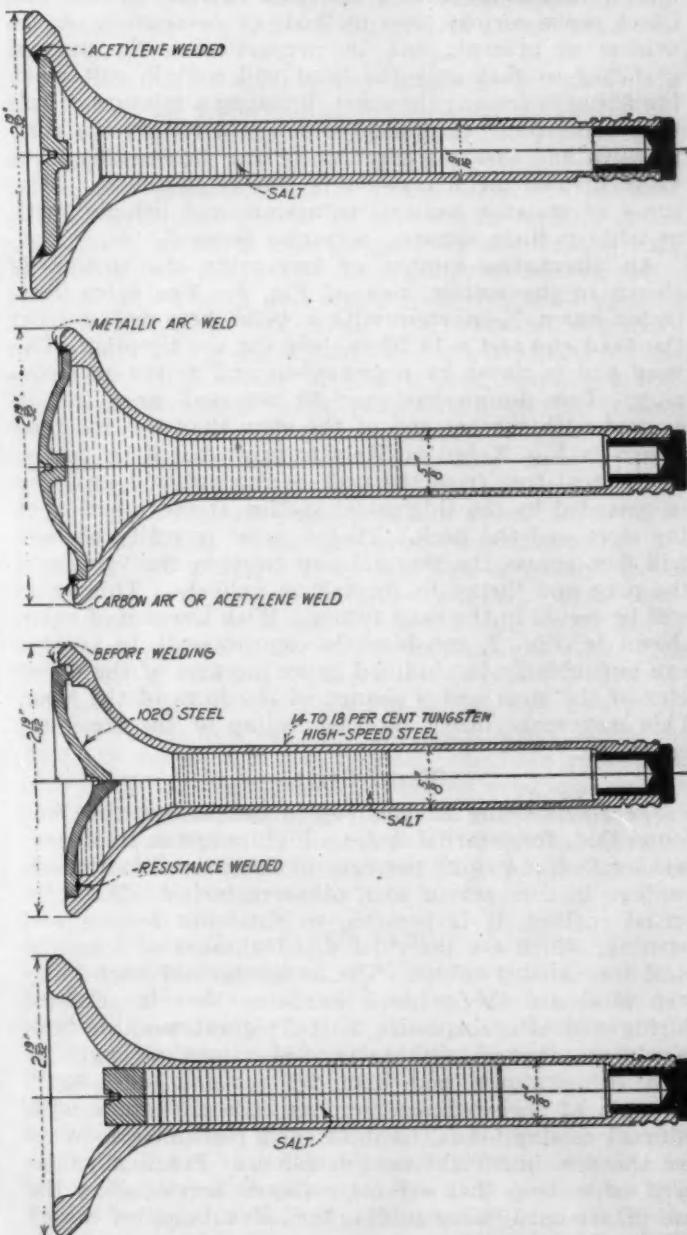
FOUR FORMS OF EXHAUST-VALVE FOR THE TYPE J CYLINDER
